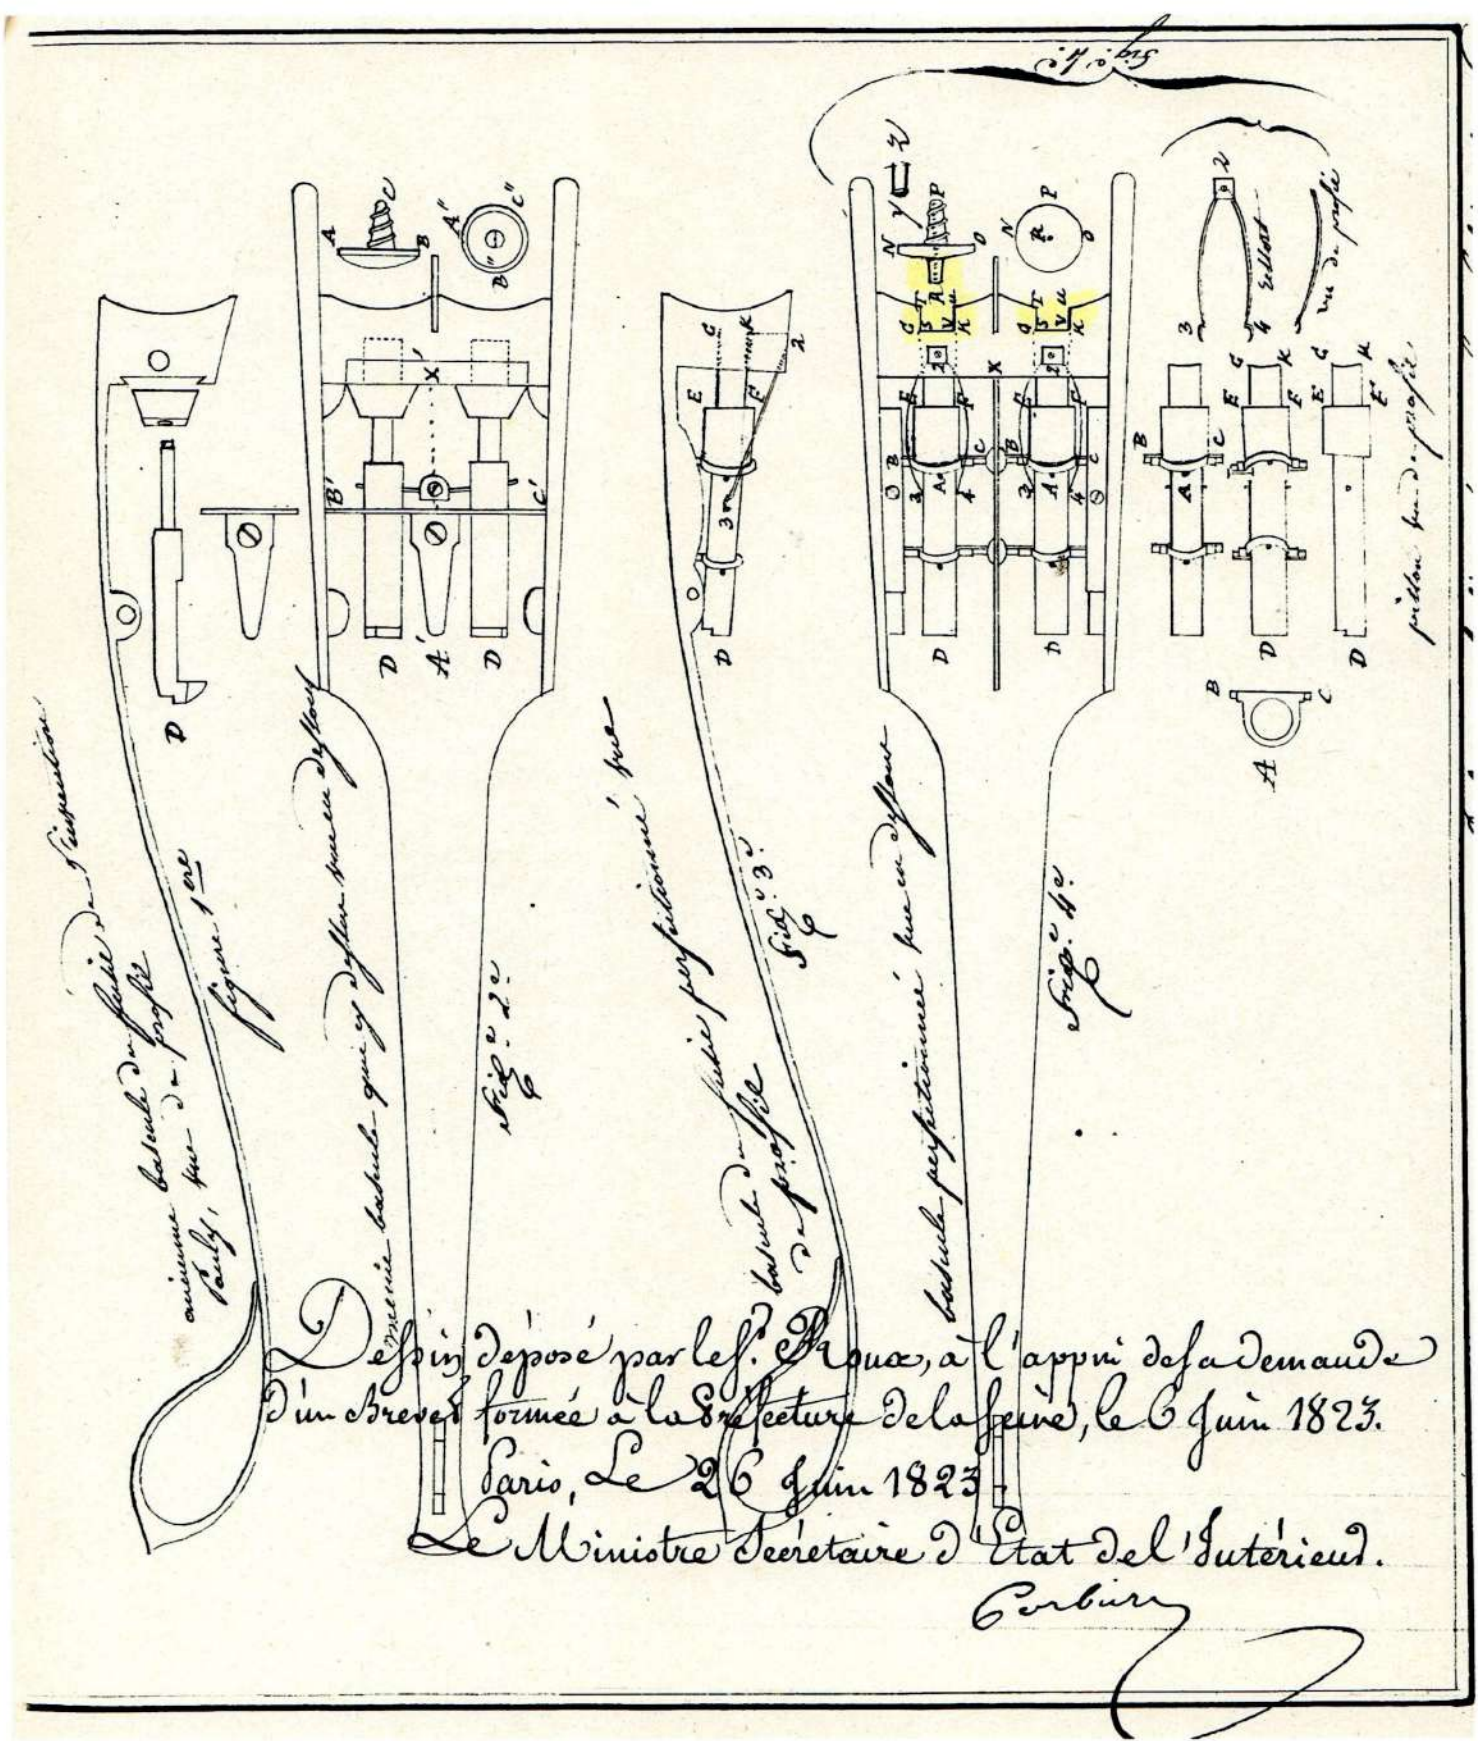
Detail of page 2 - The "*culasse mobile NOP*" here refers to the rosette as a movable lock. And on this rosette is the anvil "R" to hold a small copper tube "YZ", sealed on one side, with the ignition substance. This tube is placed on the anvil by hand.
